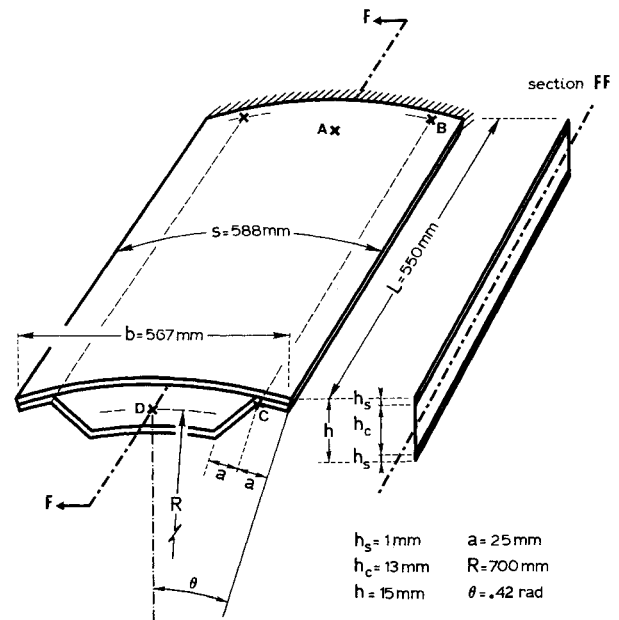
Sandwich cylindrical panel with flange edges under axial compression: geometry.
